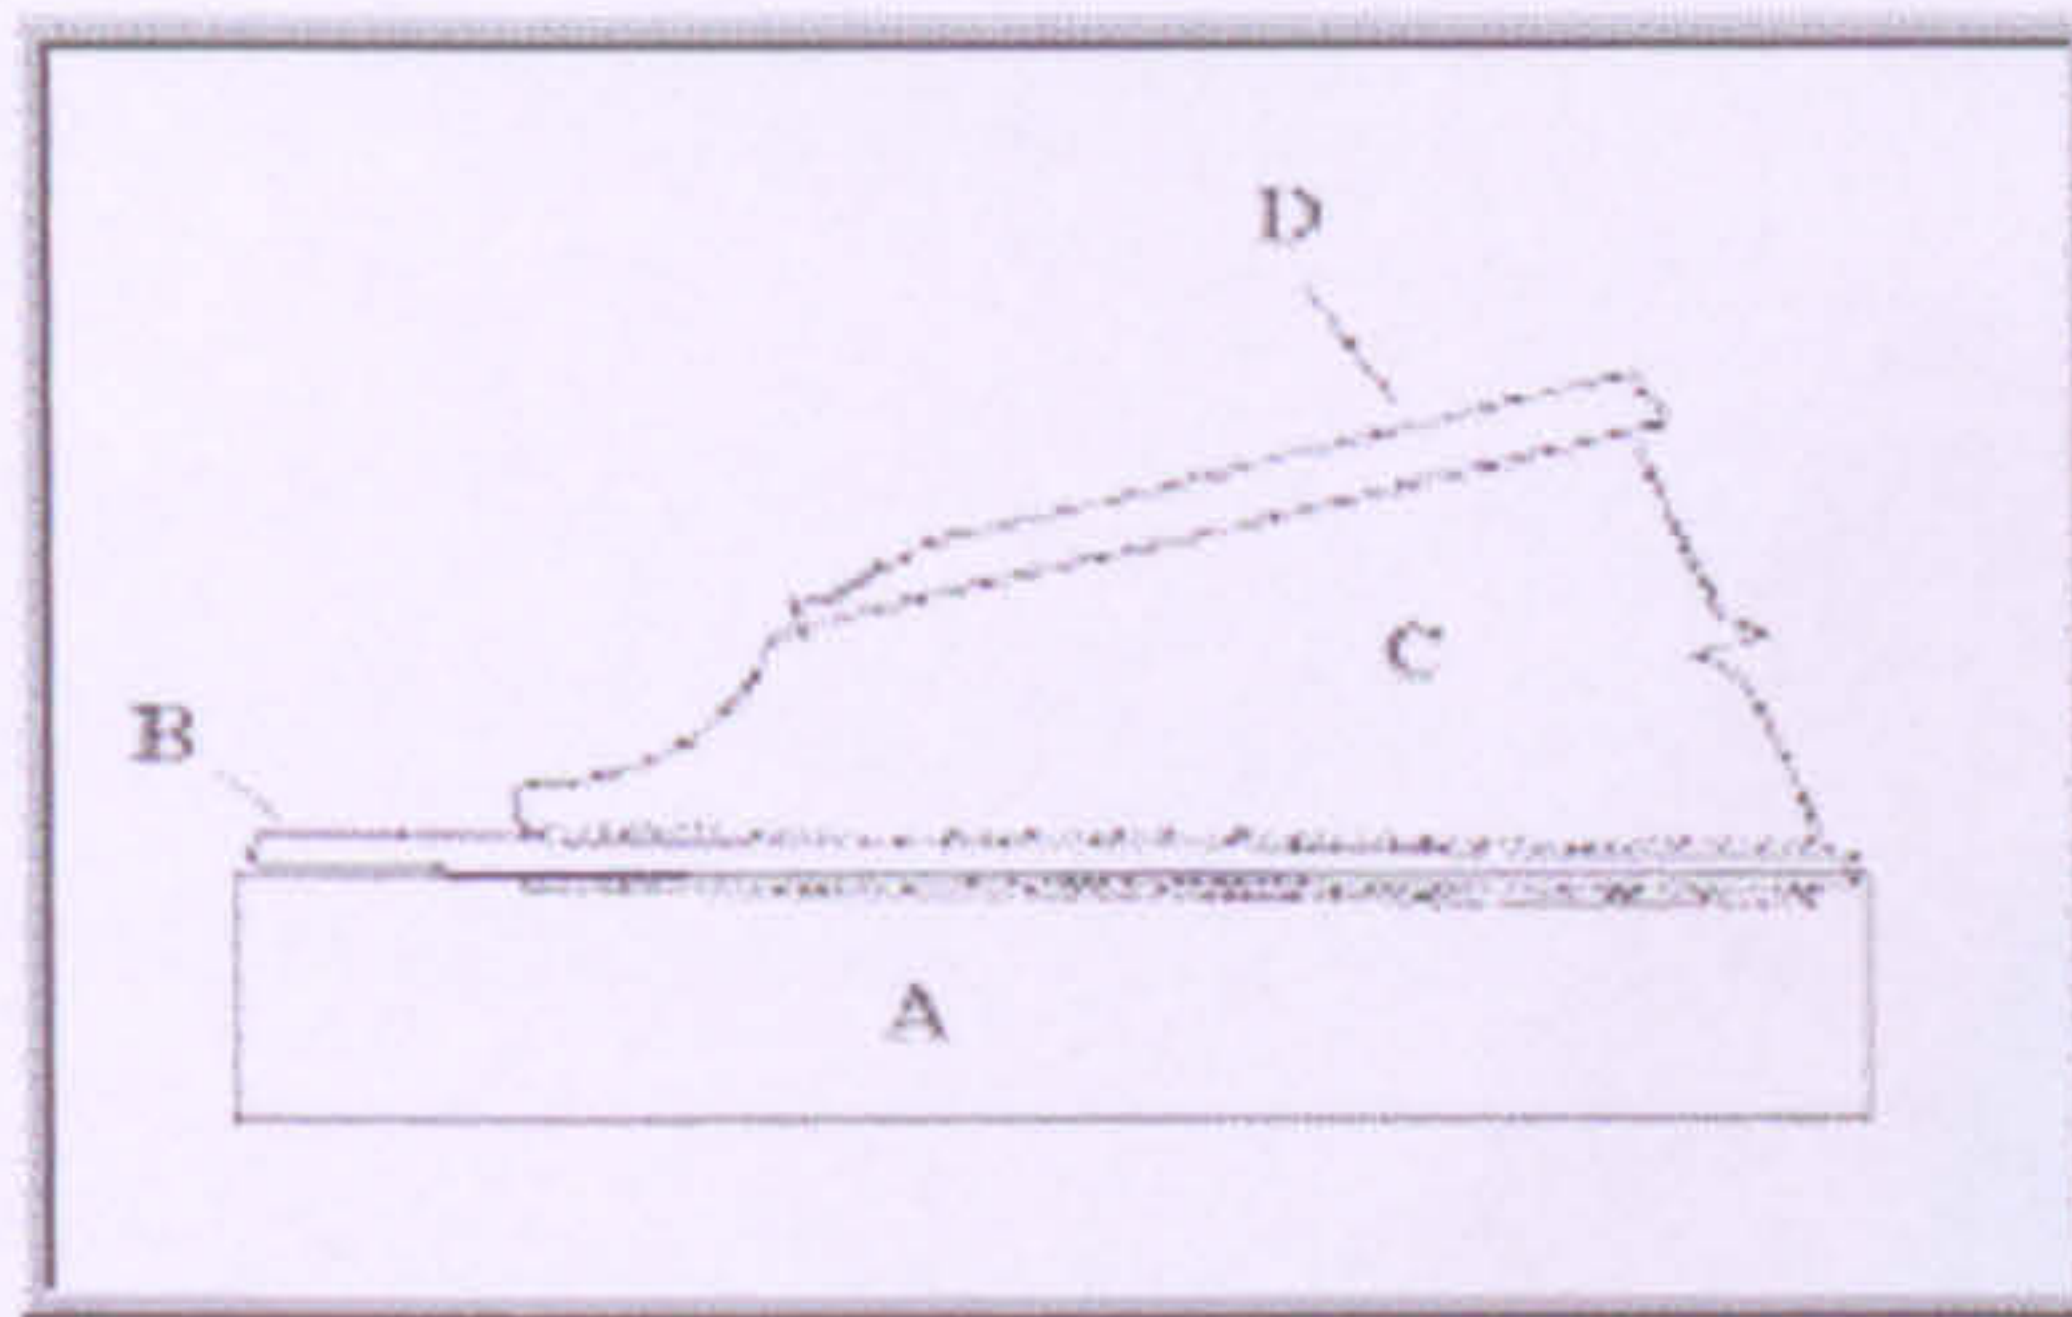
Web Toe Bracket Basic Plate Assembly
